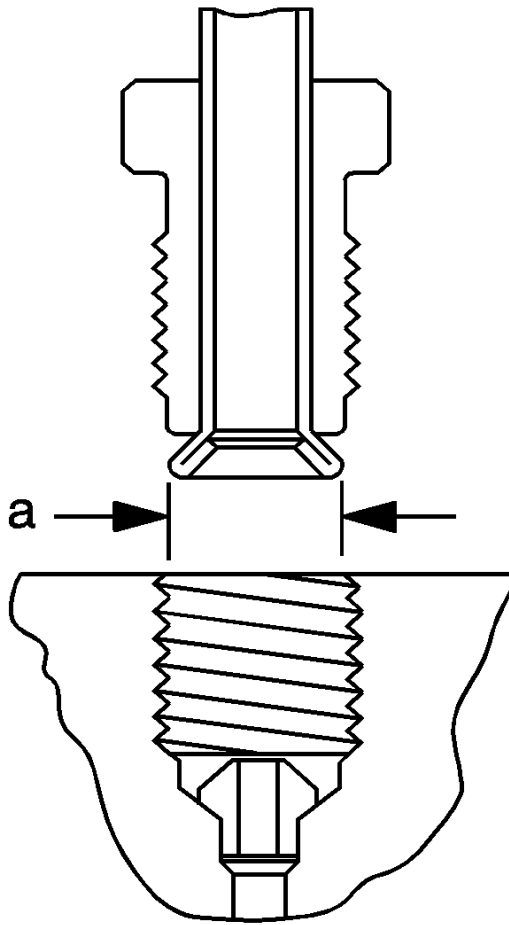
Identifying Correct Brake Pipe Flare Shape & Diameter
